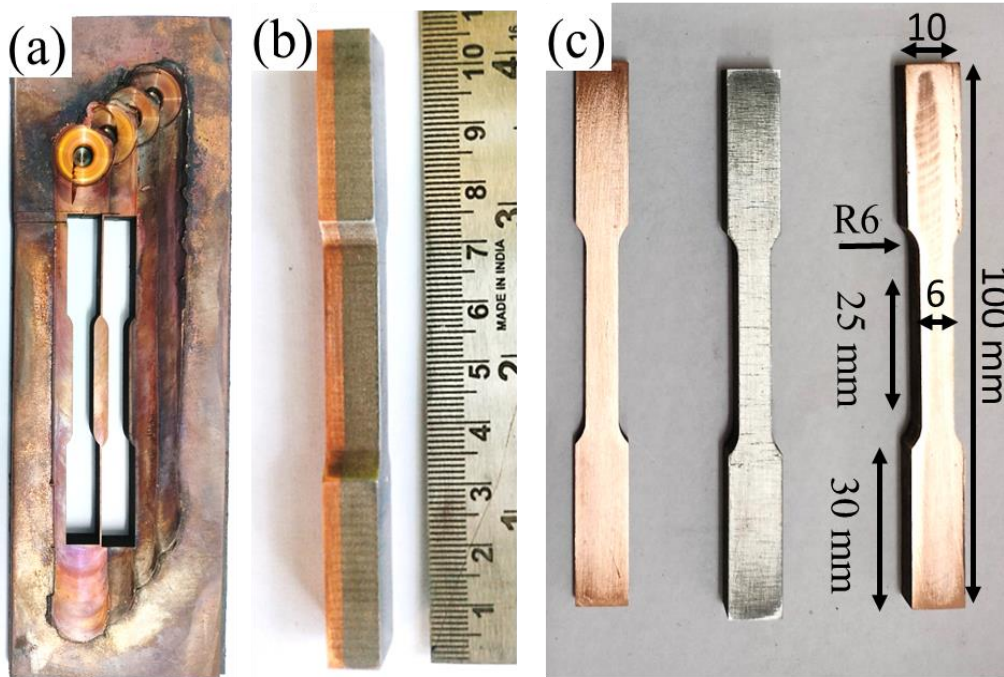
Illustration of (a) cladded plate demonstrating location of extraction of tensile specimens (b) side view of cladded tensile specimen (c) prepared tensile samples of copper, steel, and copper clad steel
